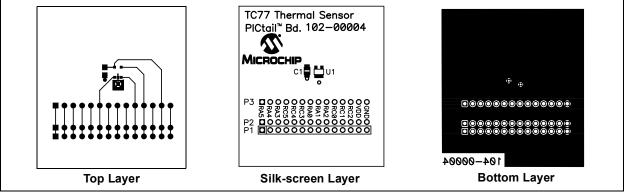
TC77 PICtail™ Daughter Board PCB Layout.
